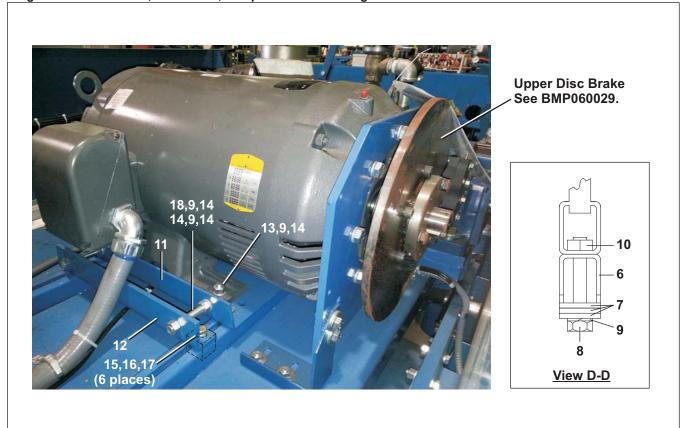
Motor mount, drive shaft, and pillowblock bearings
